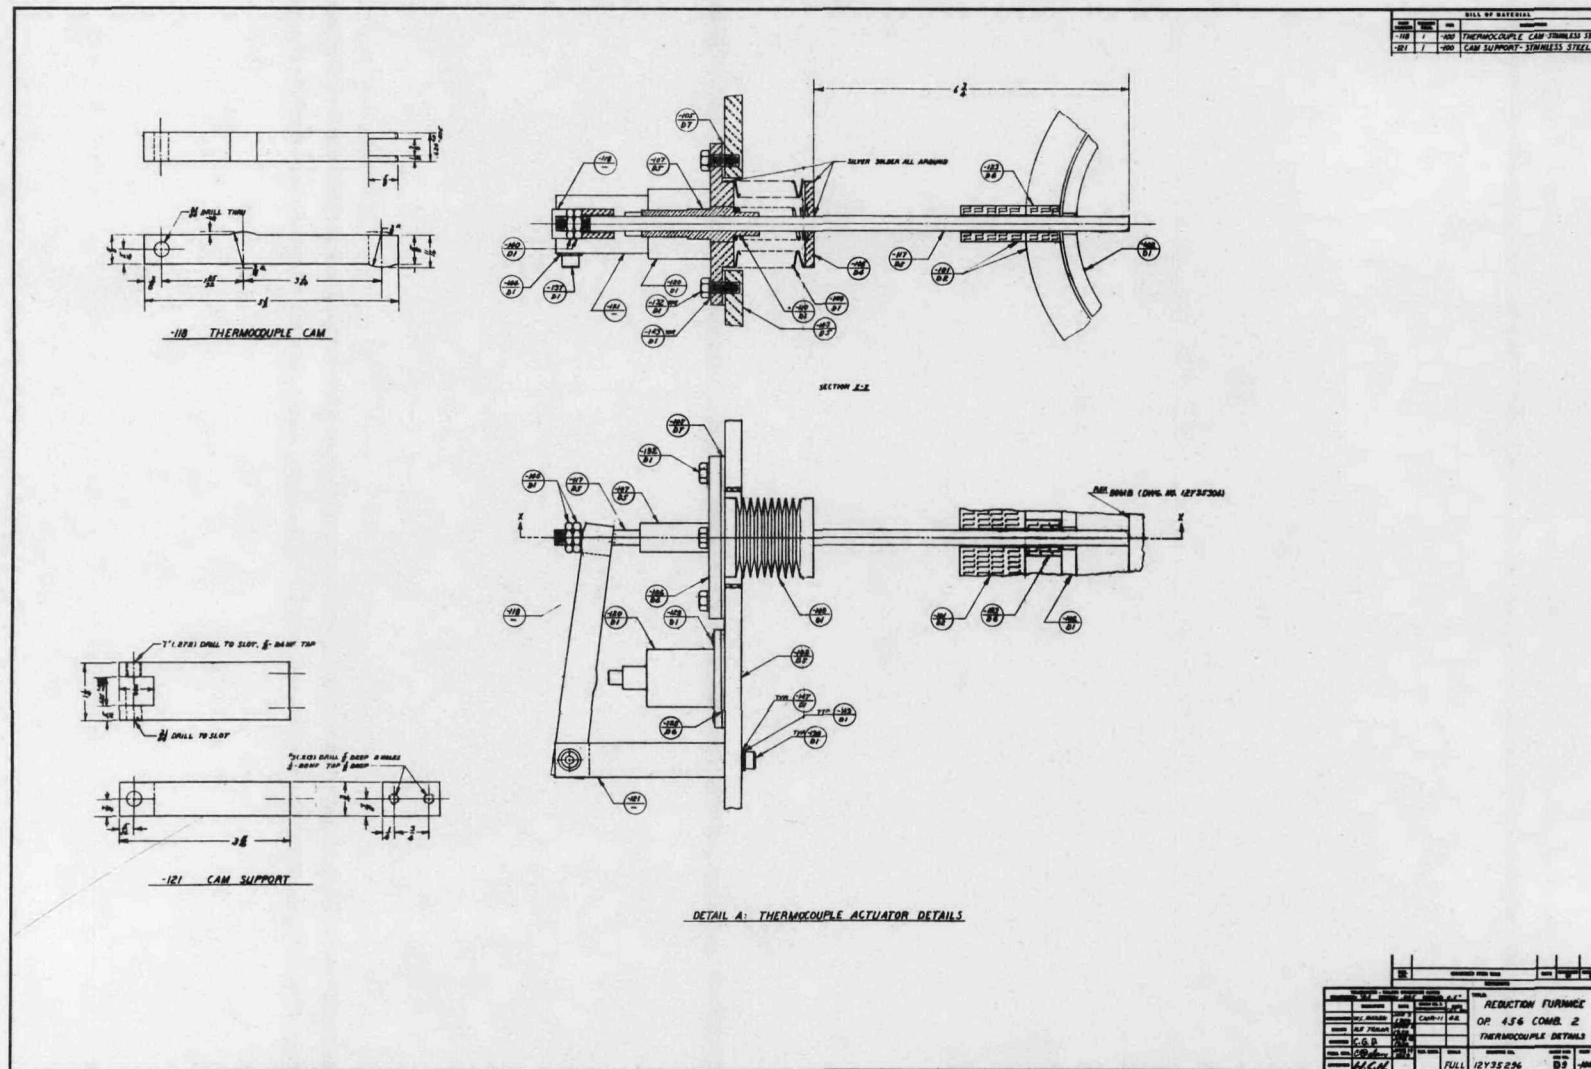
Design layout of reduction furnace thermocouple well assembly.
